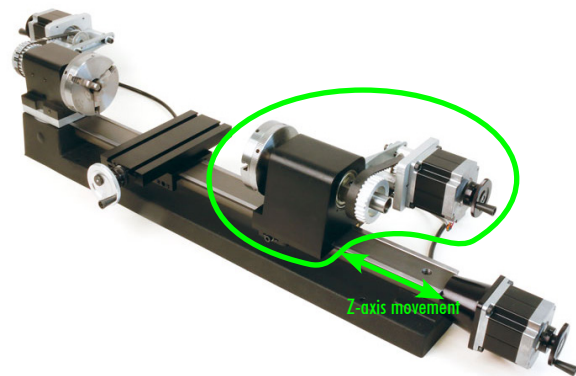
The green outline indicates the moveable headstock on the Z-axis. The headstocks on this lathe are turned by stepper motors with cog pulleys.
